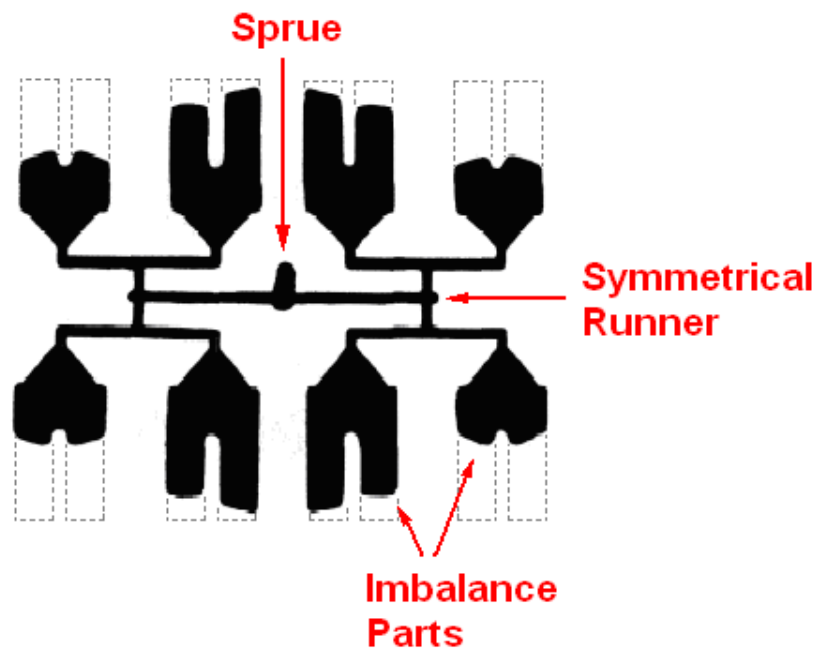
Imbalanced Filling in Symmetrical Multi Cavity Mold [3]
